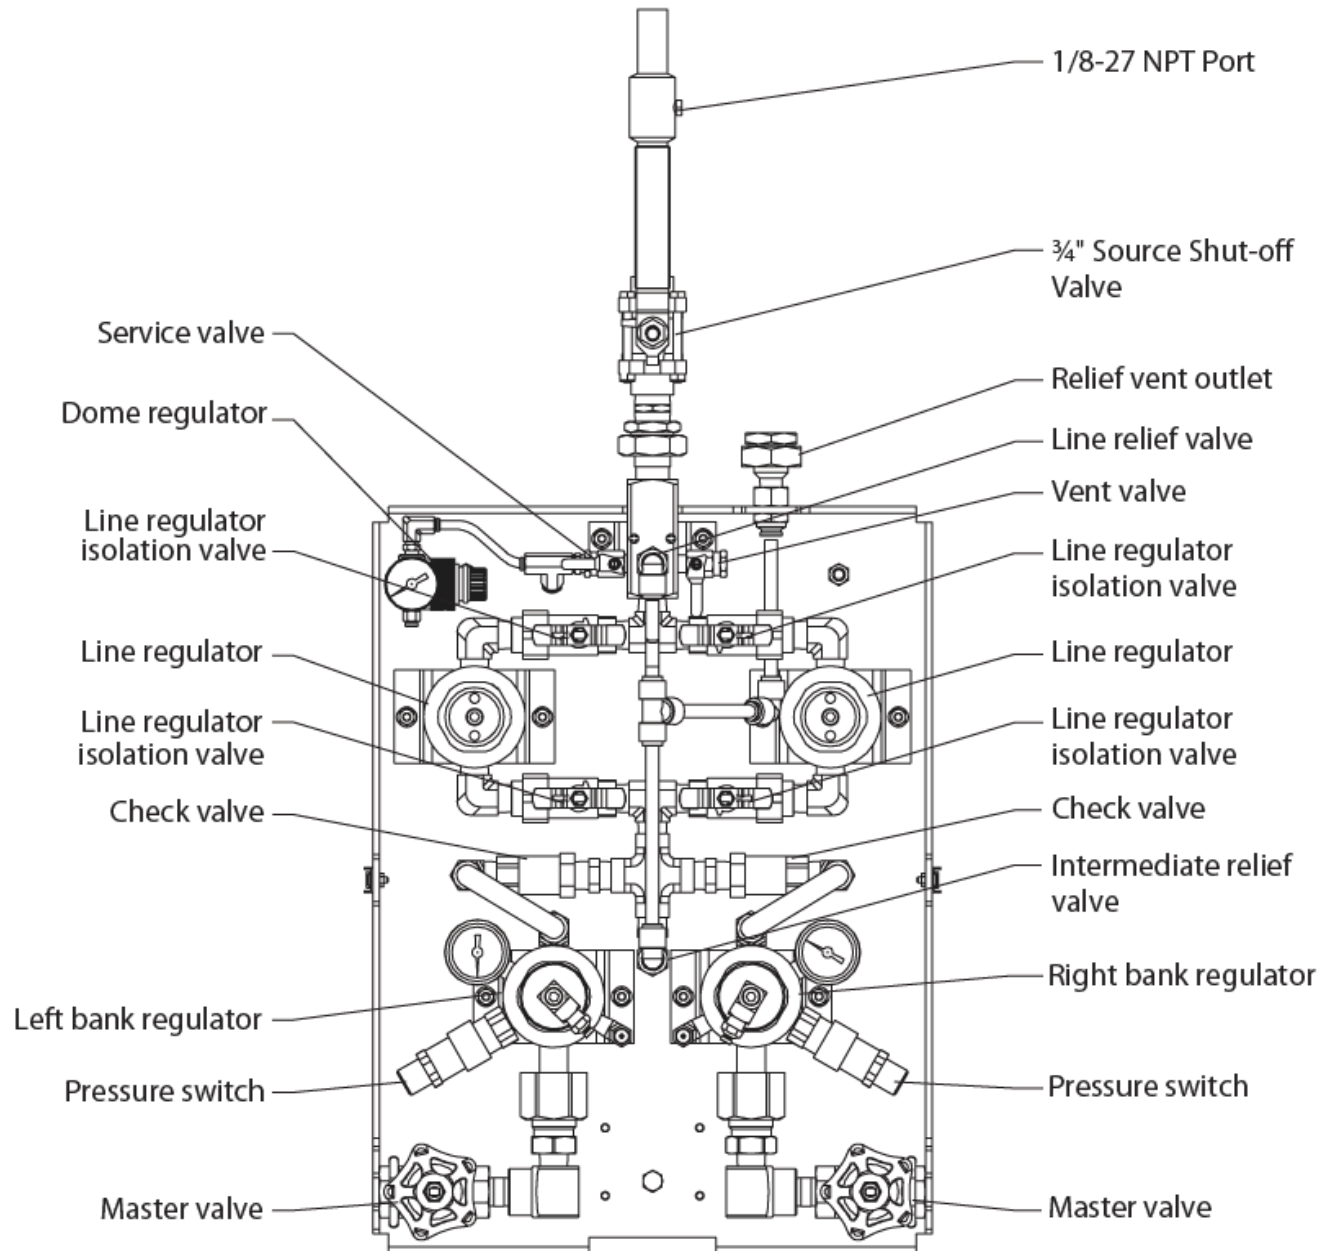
Inside of Medical gas manifold assembly cabinet [\[Image Description\]](#)
